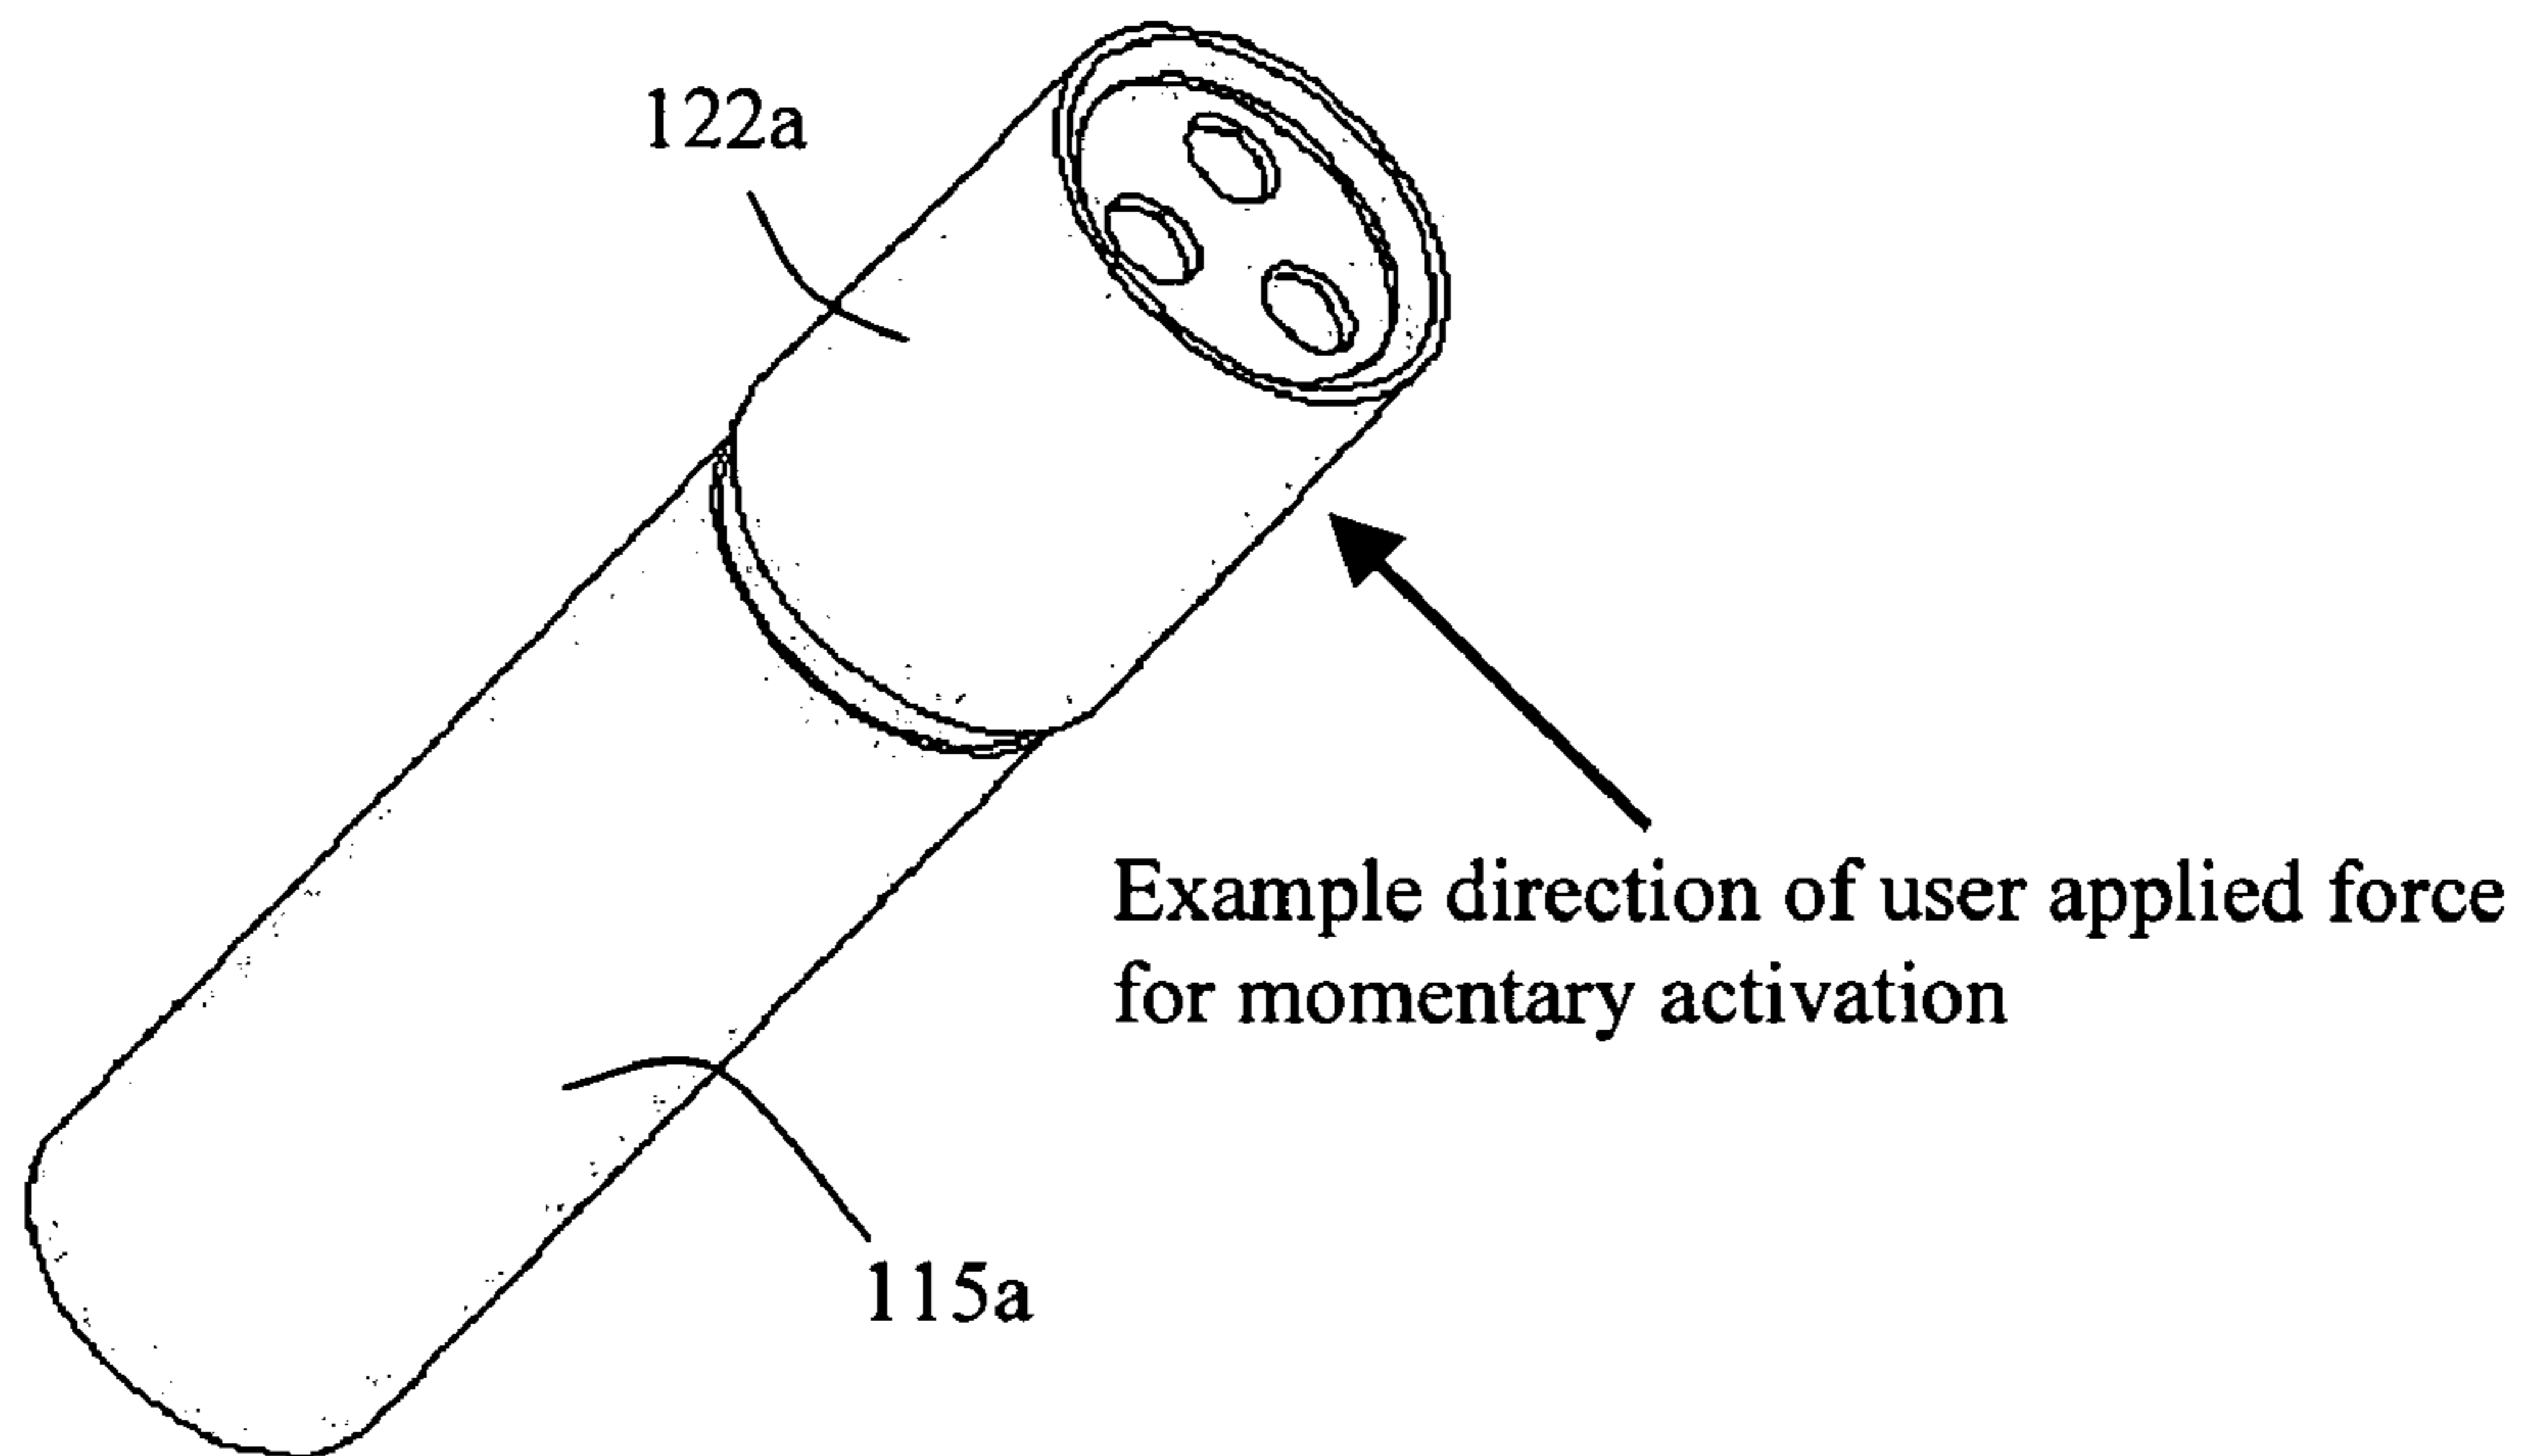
A: Perspective View of the Preferred Embodiment, Assembled.
